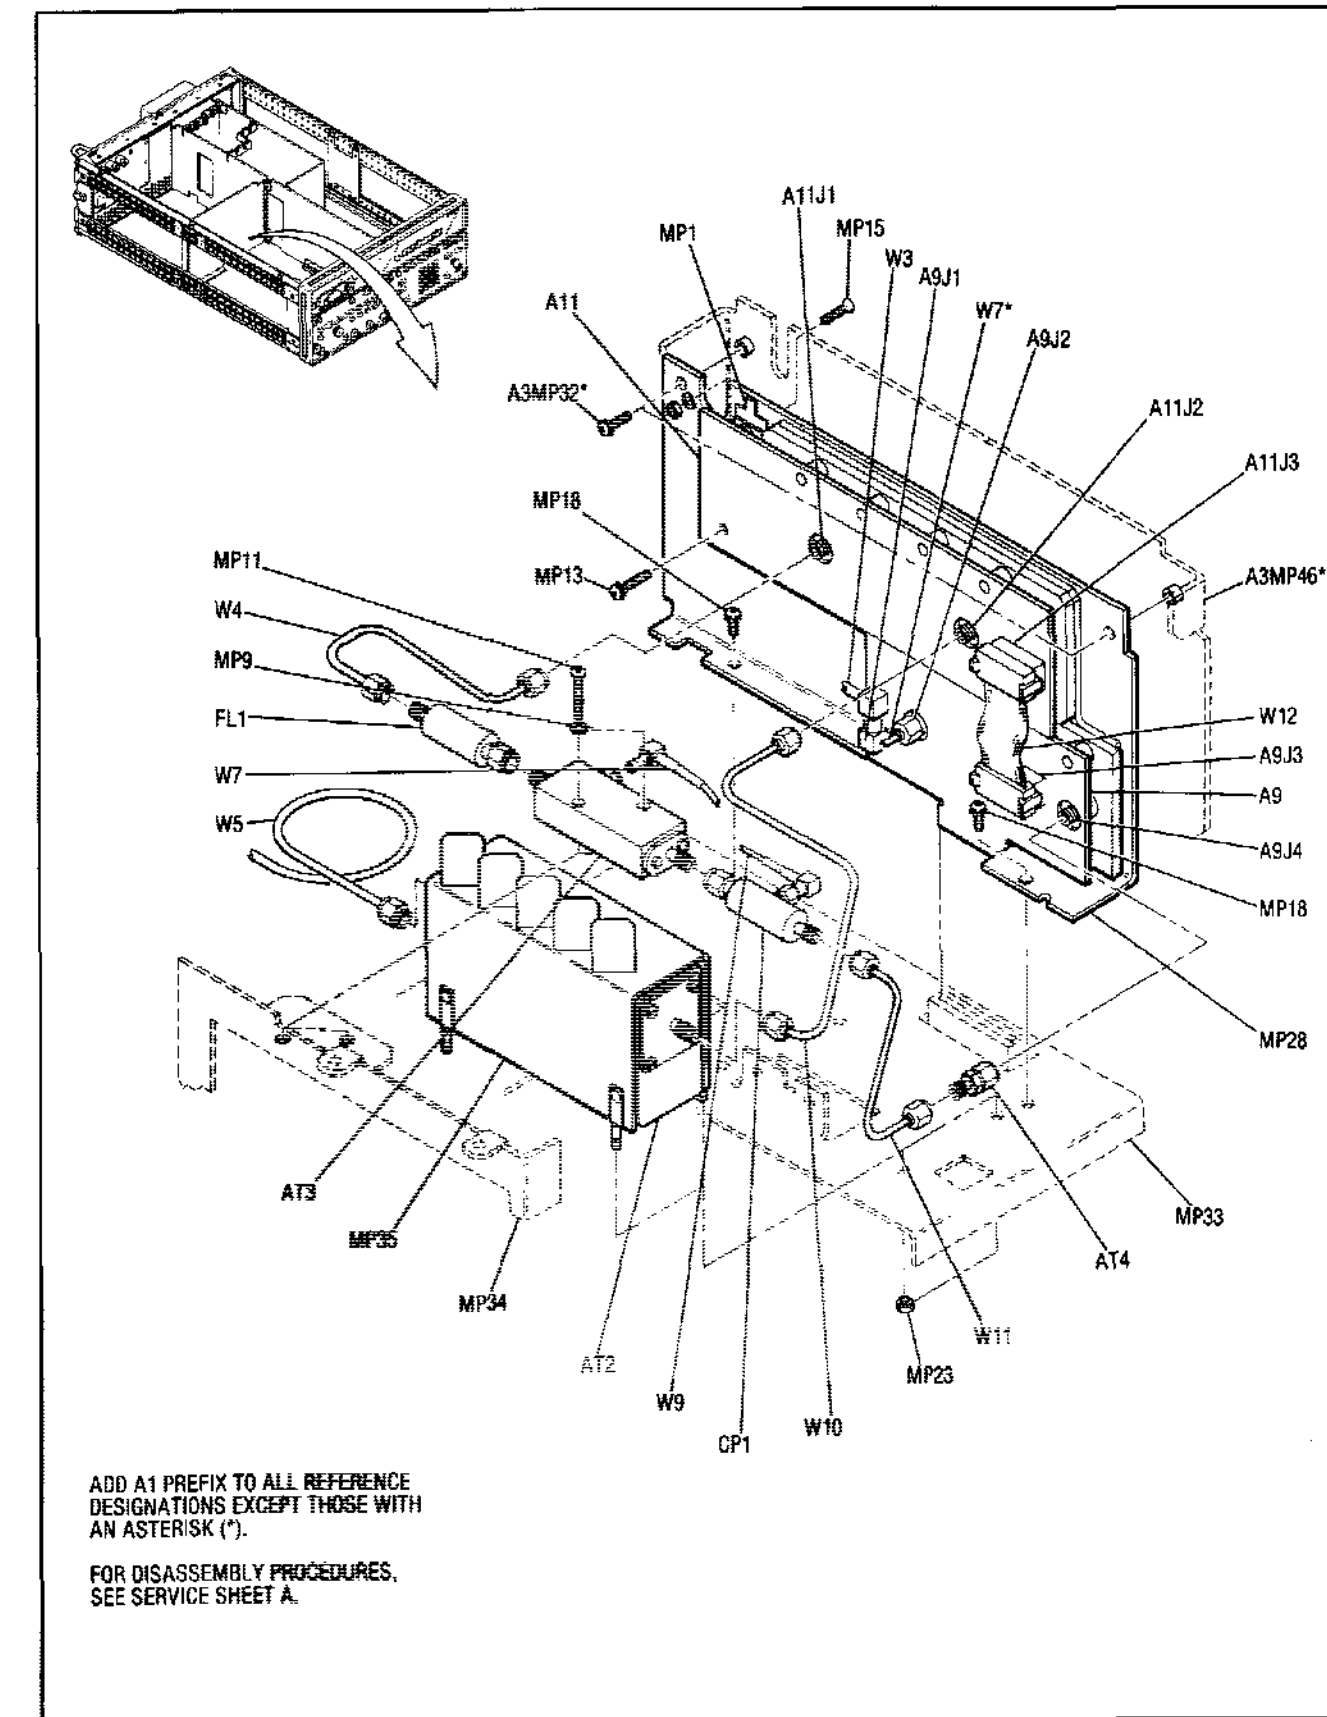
A1 RF Output Assembly, Preamp and Power Amp
